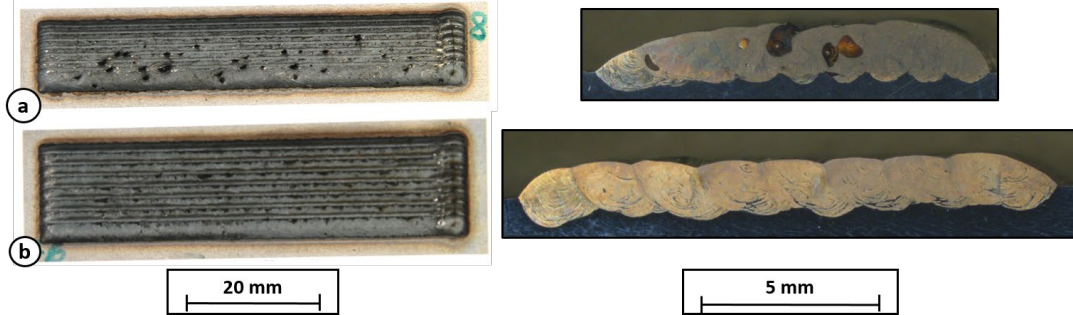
Top view and cross-section of two claddings made of AISI52100 a) Welding Parameters: laser power 2.1 kW, wire feed rate 2 m/min, welding speed 1200 mm/min, current 45 A, weld seam overlap 50% b) Welding Parameters: laser power 1.95 kW, wire feed rate 1.5 m/min, welding speed 800 mm/min, current 75 A, weld seam overlap 35%
